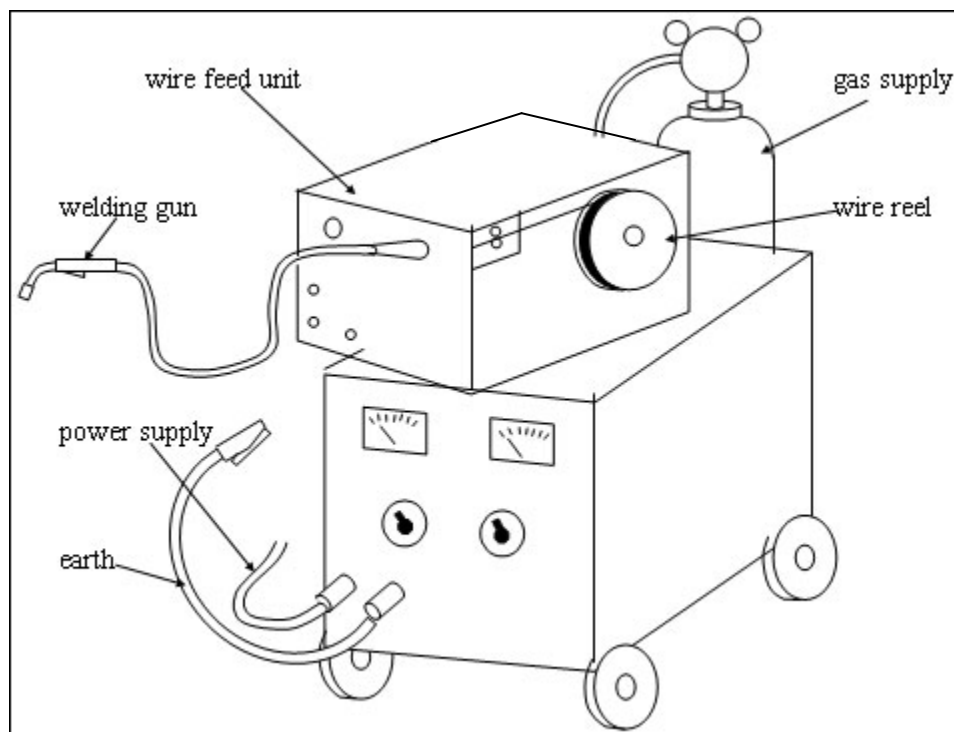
Gas Metal Arc Welding System [6].
